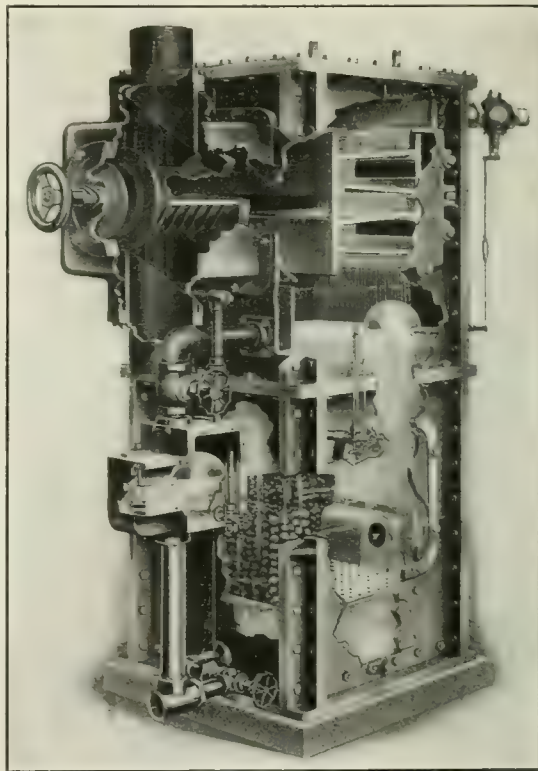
Interior View, Showing the Arrangement of the Various Parts of the Heater.
